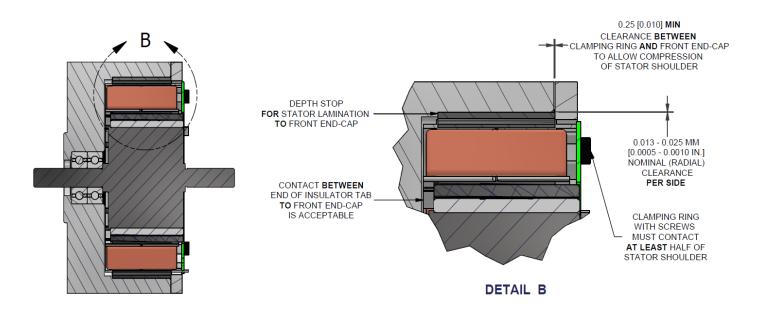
Detail view of Stator Axial Clamping to Housing Assembly
